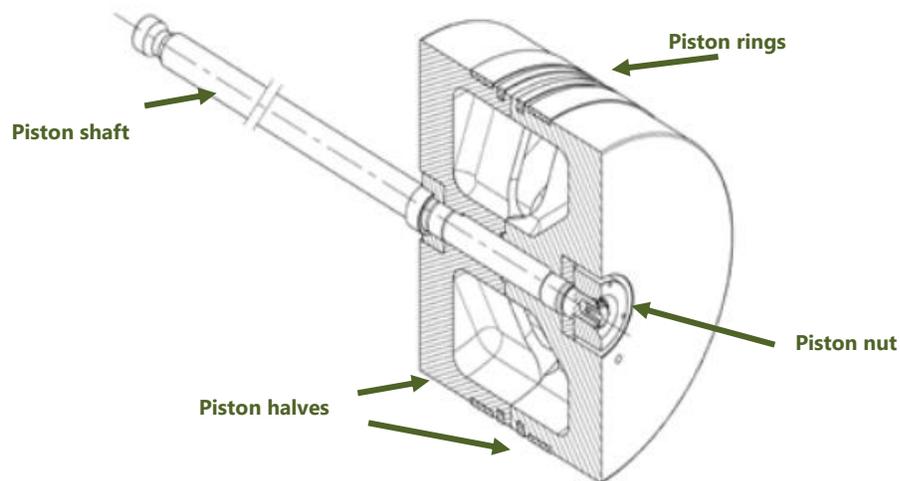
SECTION VIEW PISTON ASSEMBLY – PISTON HALVES MOUNTED ON PISTON ROD
